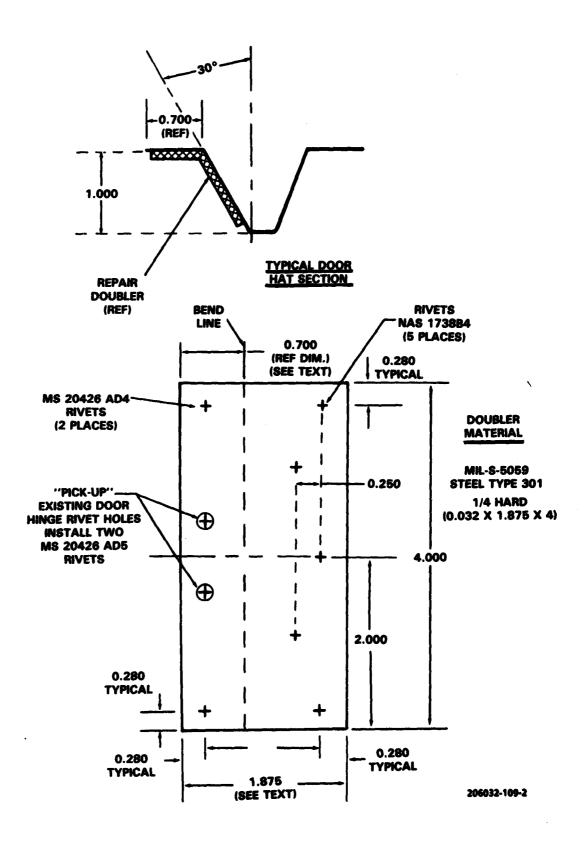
Repair — Stud Tearout and Door Hinge (Sheet 2)
